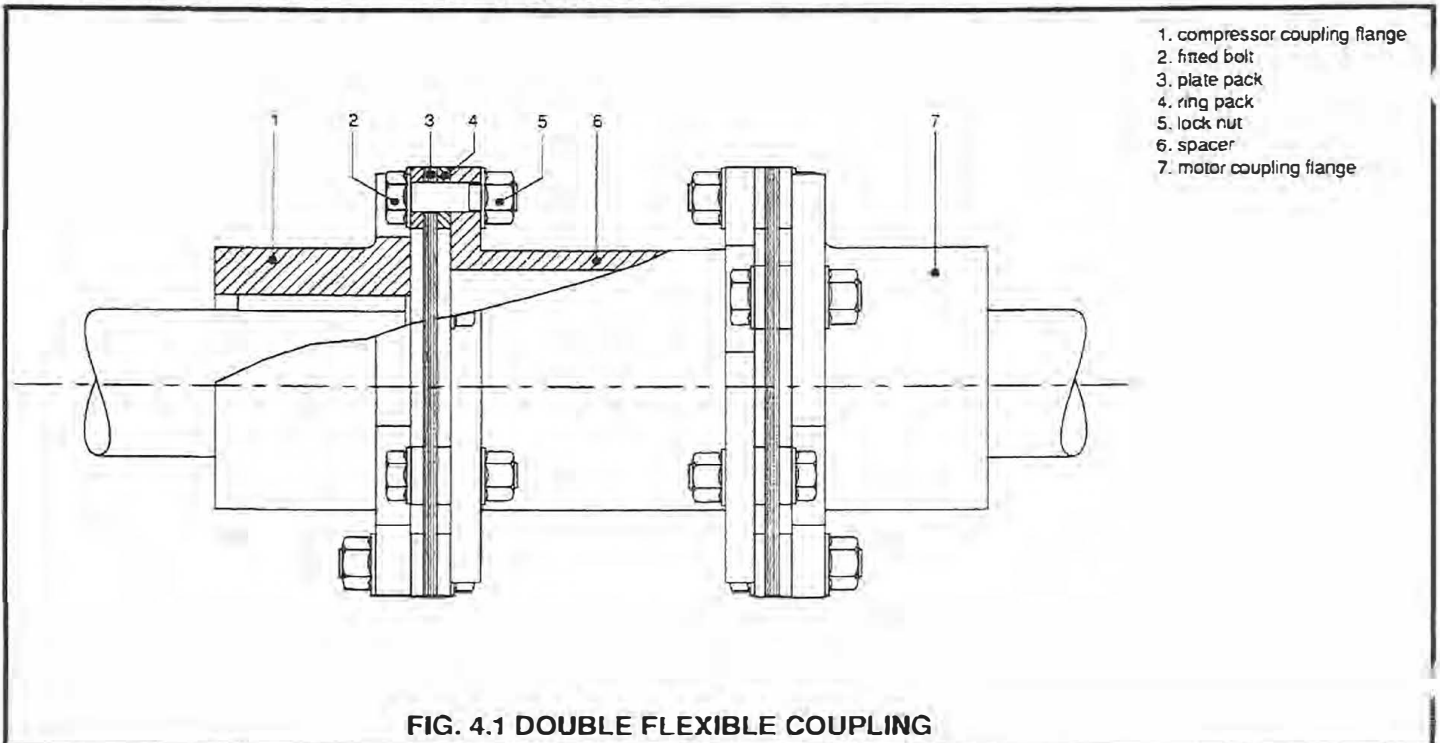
consists of two flanges (1 and 7), two stainless steel plate packs (3) and a spacer (6). The steel pack is an integral assembly consisting of individual plates and bushings, captured by retainer rings (4). Since all junction points are built up this way, the plate pack represents a compact unit.
